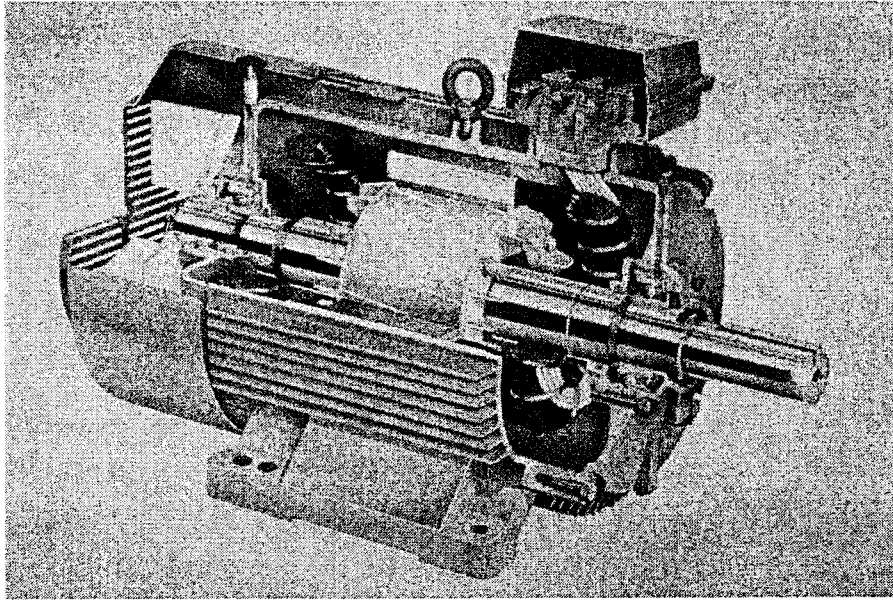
Longitudinal view of a squirrel cage induction motor
